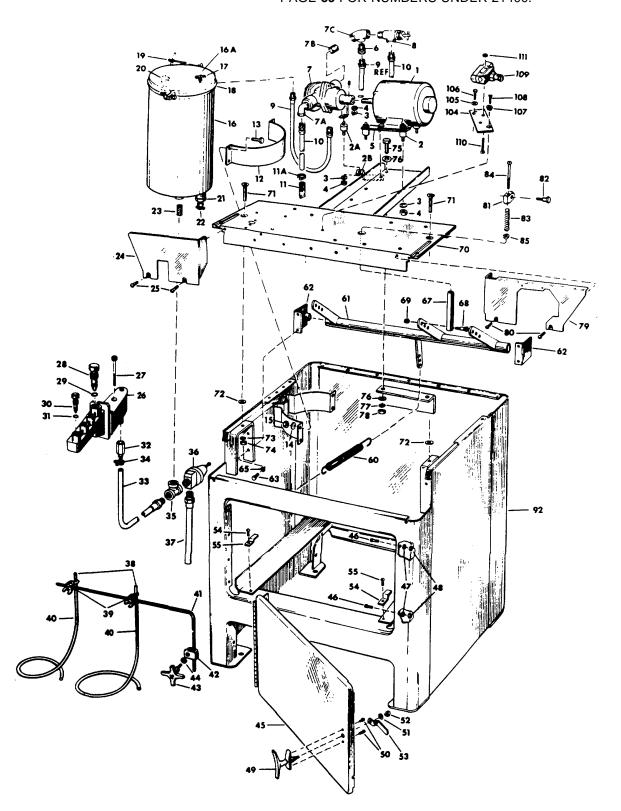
BASE, FILTER, PUMP & OIL CONTROL ASSEMBLY
